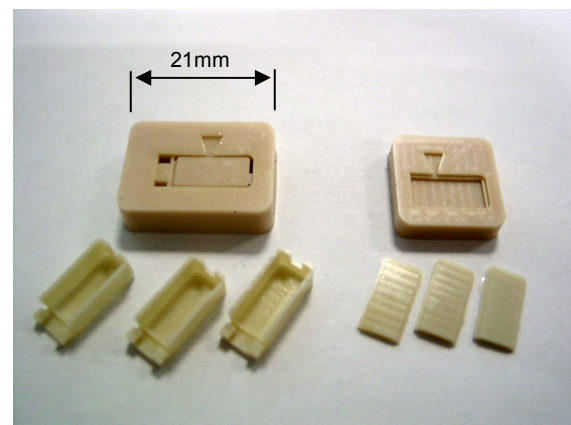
Silicone mould for SMA actuator housing (left) and housing cover (right)
